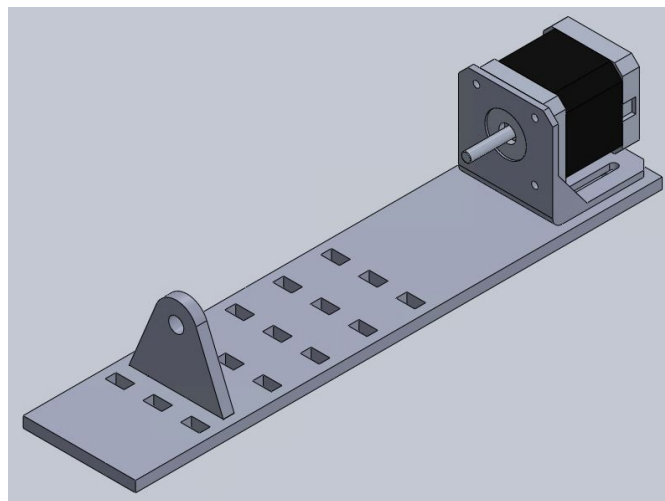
SolidWorks Assembly of the Rotating Bed Excluding the Print Rod
